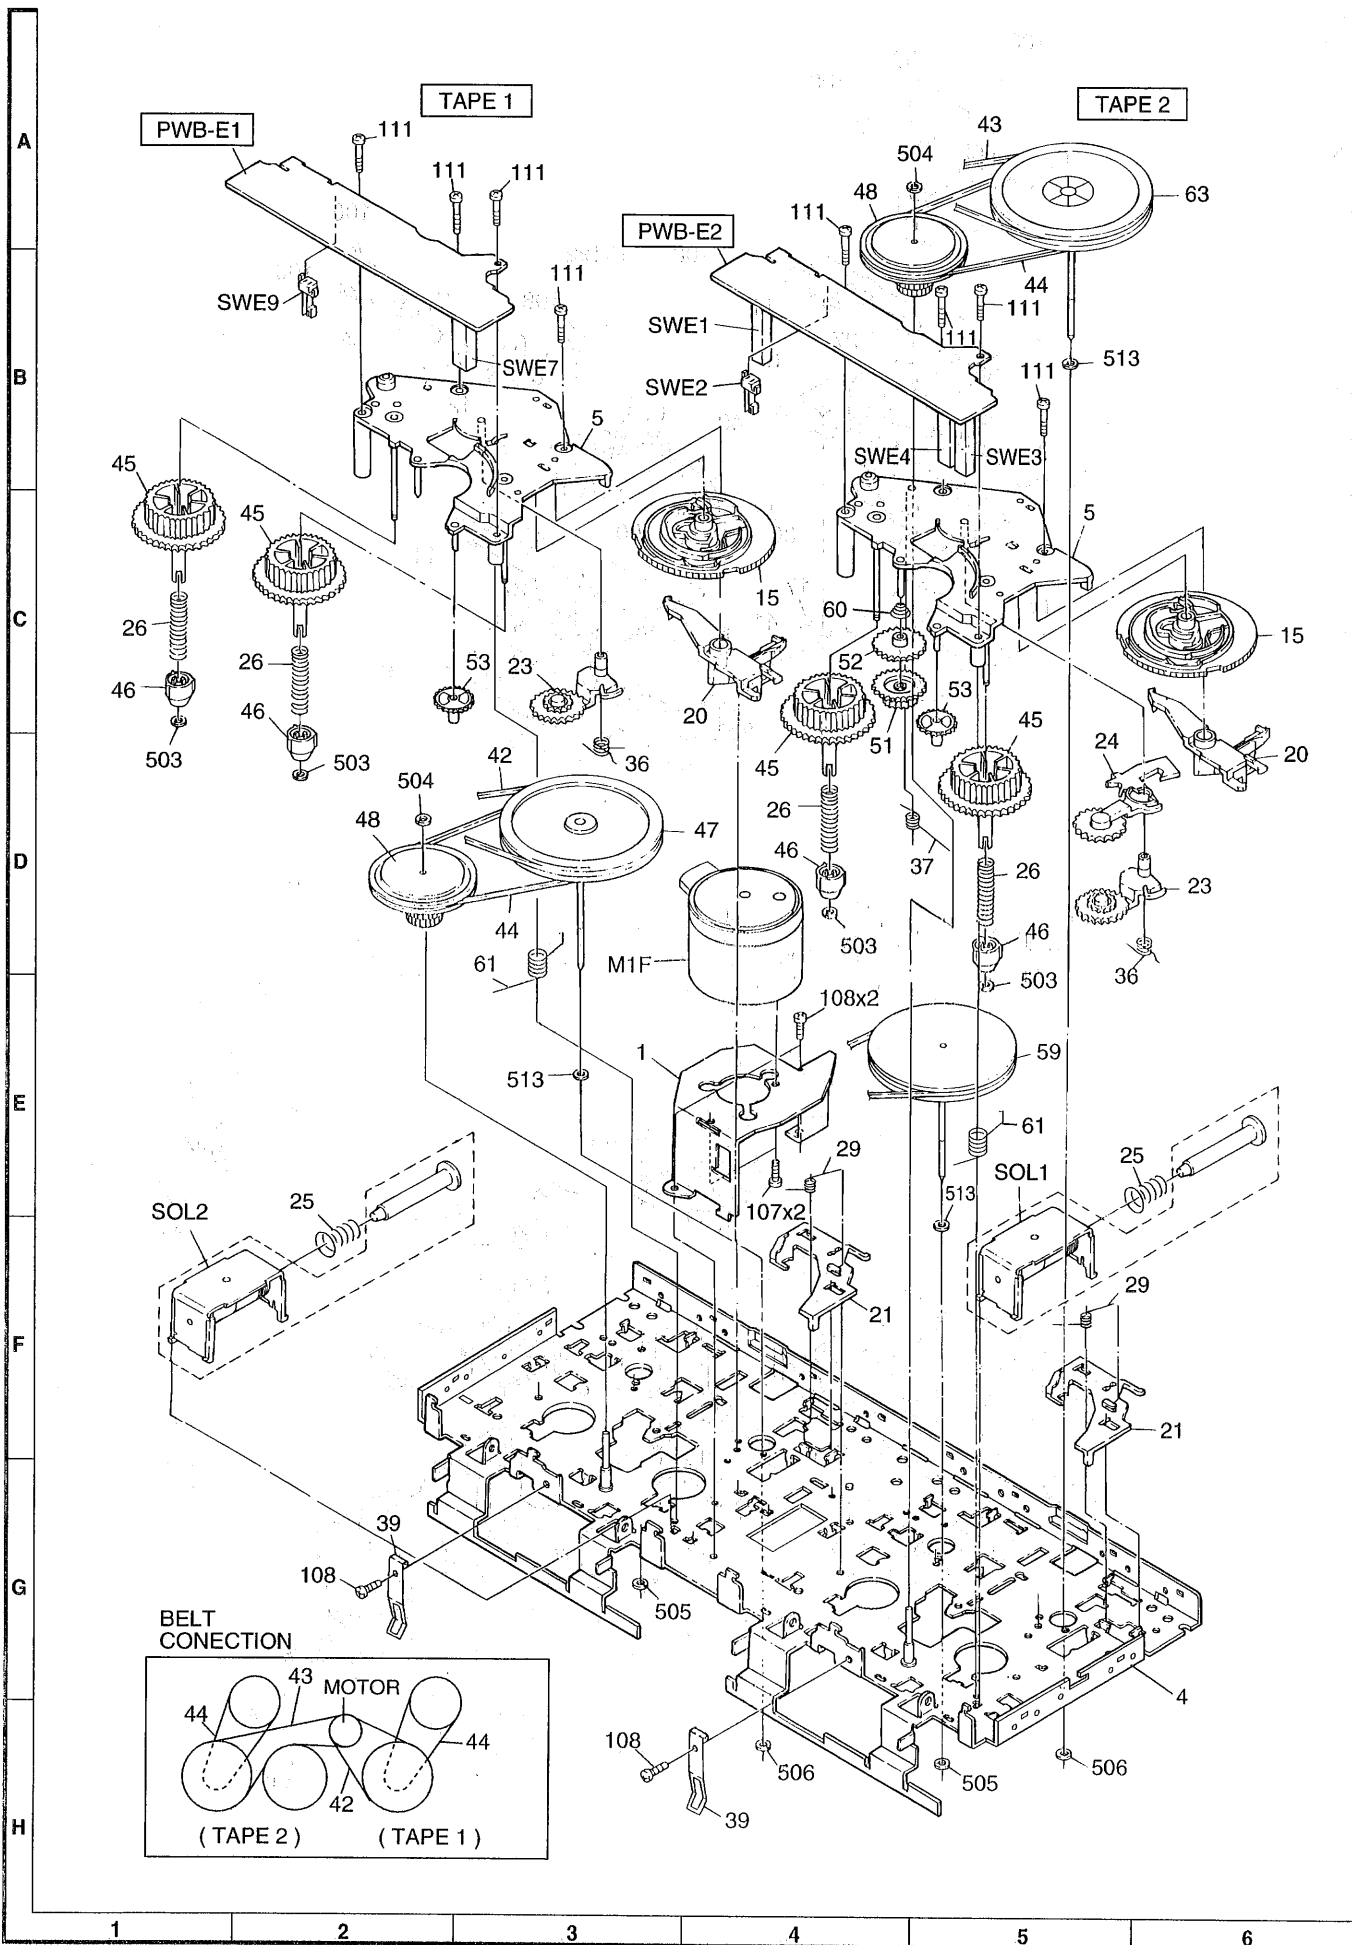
TAPE MECHANISM EXPLODED VIEW (2/2)
